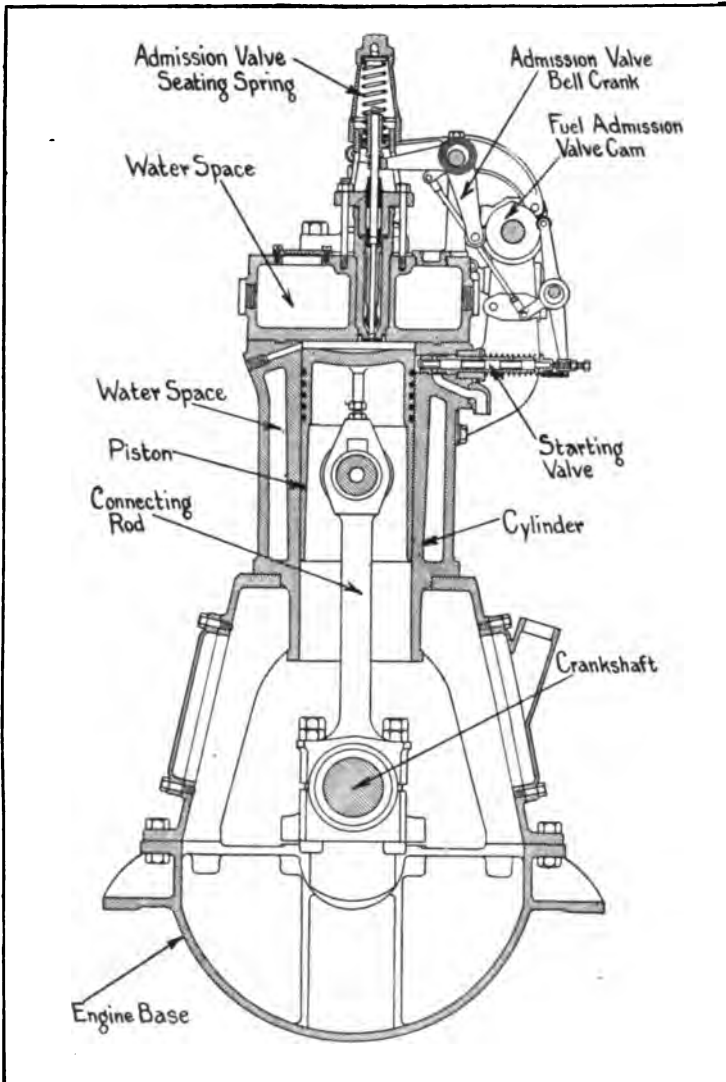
End sectional view of the Gardner-Diesel engine, showing arrangement of parts of four-cycle type power plant.
